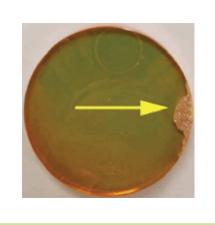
Lens edge chipped due to a stress caused by a defective lens mount
